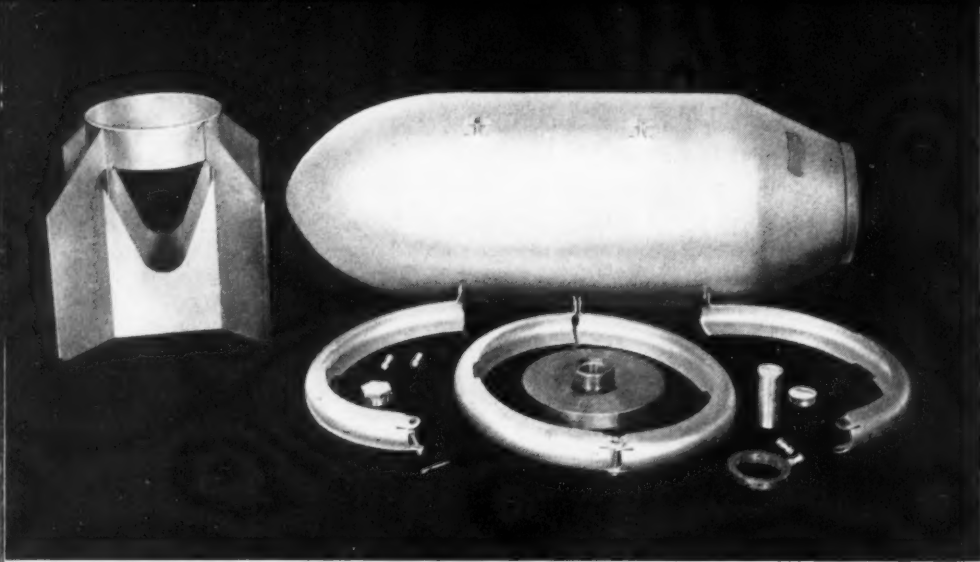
A 1000-pound Bomb, with Base Plug, Fuse Parts, Fin, and Protecting Rings
